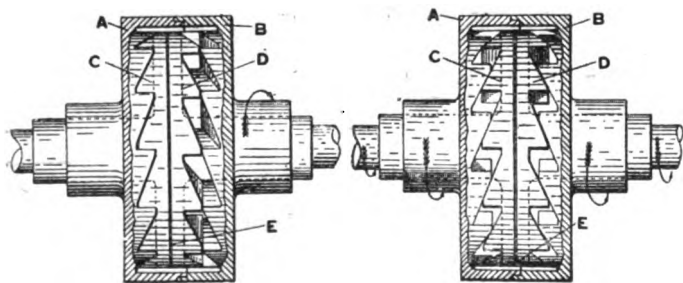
The F.R.V. Gearless Differential. The view shows the position for straight ahead driving.
